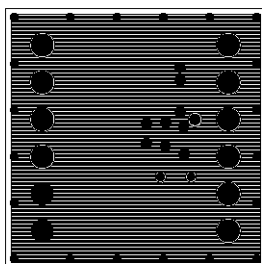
SMP-TPS7A3001-MVK Board Layer 3 – Top Side
